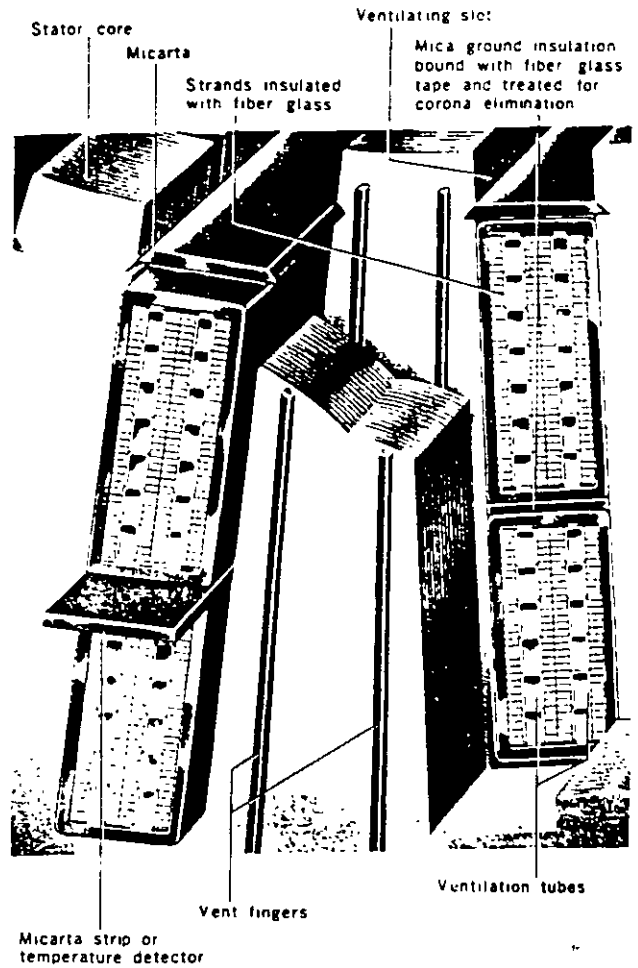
Cross-section of stator coil—inner cooled (double stacks of vent tubes)
